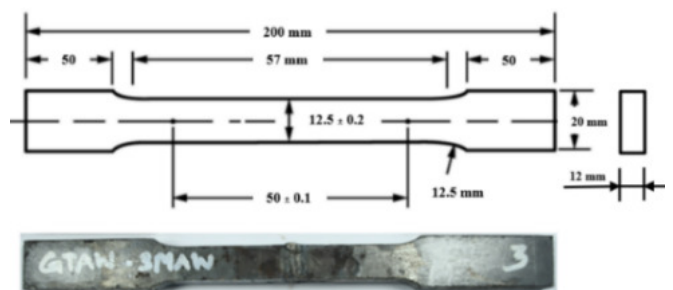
ASTM E8M-22 standard tensile test specimen.
